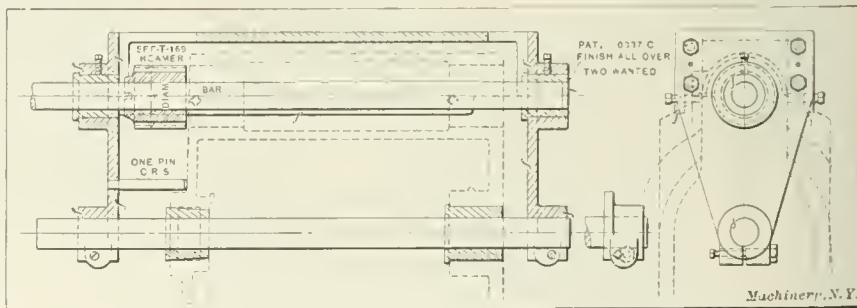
Showing Construction of Arm Hole Jig and the Spindle Bar
